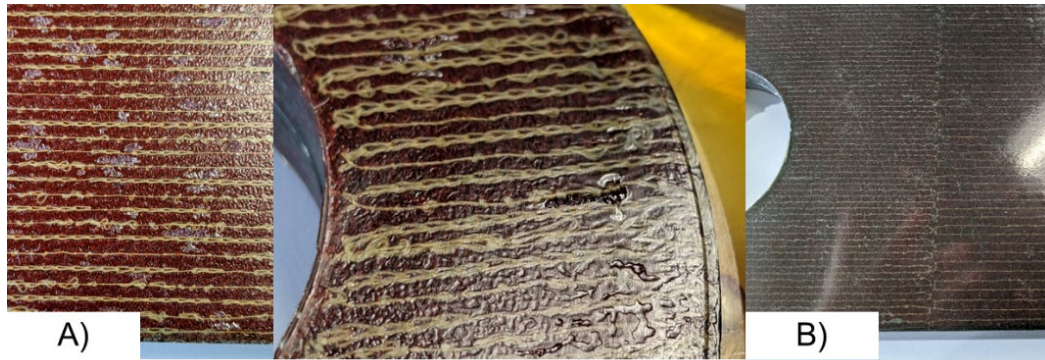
Optimized Parameters for IM7 Lug (Shown with Parameters optimized to reduce defects)
